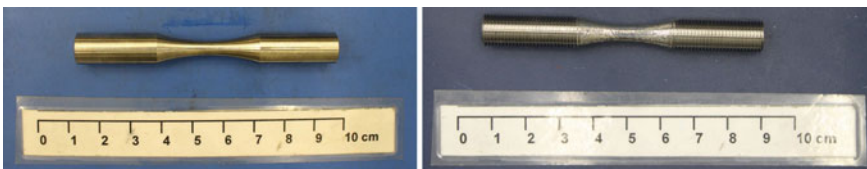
Machined specimen with smooth clamping surfaces (left) and electrochemically polished specimen with machined M10 threads fatigue test performed for $R = -1$ (left) and $R = 0.1$ (right)
